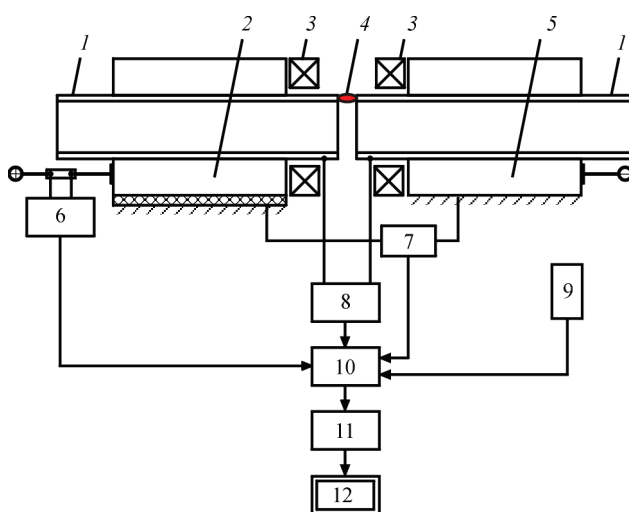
Block diagram of the model of quality testing of welded joints: 1 — welded pipes; 2 — moving clamping device; 3 — elements of magnetic system; 4 — electric arc column, moving along the edges of welded pipes; 5 — fixed clamping device; 6 — current sensor with instrumental signal amplifier; 7 — sensor for position of moving part of the welding machine; 8 — sensor for voltage drop on the welding arc; 9 — sensor of measurement of absolute pressure of hydraulic system built in a rod cavity of the cylinder, upsetting of welding machine; 10 — normalizing instrumental amplifier (with low pass filter $F_{cut-off} = 100$ Hz); 11 — receiving analogue-to-digital converter (ADC), 12 — personal computer
